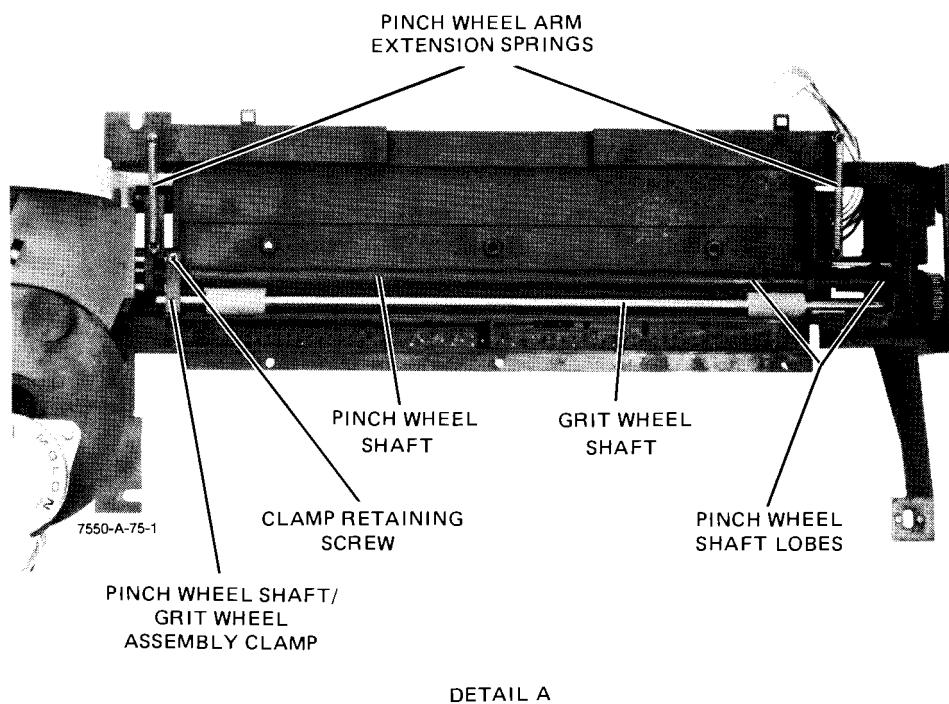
Pinch Wheel Shaft and Grit Wheel Assembly Removal
